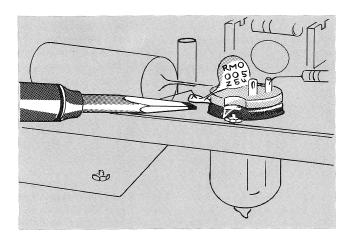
Soldering to a terminal. Note the slight fillet of solder—exaggerated for clarity—formed around the wire.
